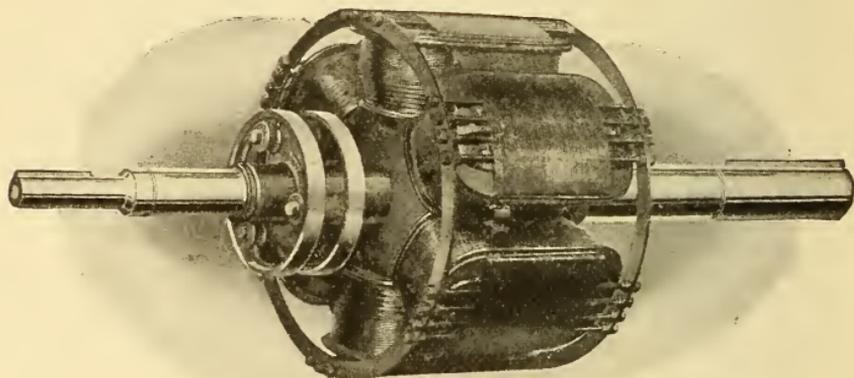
Rotor for Self-starting Synchronous Motor.
